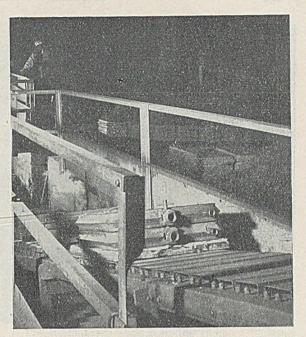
Moulds emerging from the Tunnel, carried on a Different Type of Slat Conveyor, and joining a Roller Conveyor leading to the Knockout.
